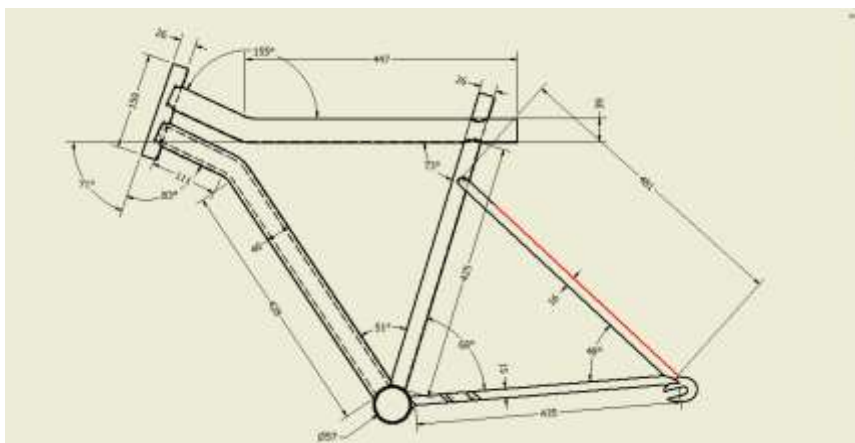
CAD design of bicycle frame (All dimensions are in mm.)
